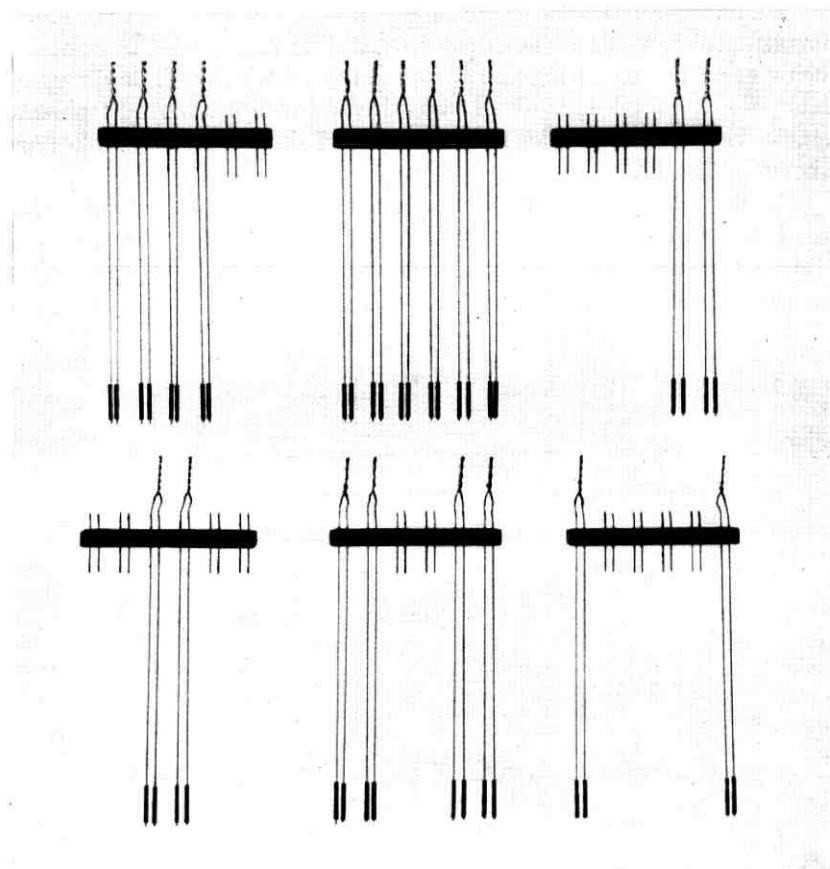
BF relay typical coded movable twin wire assemblies.
